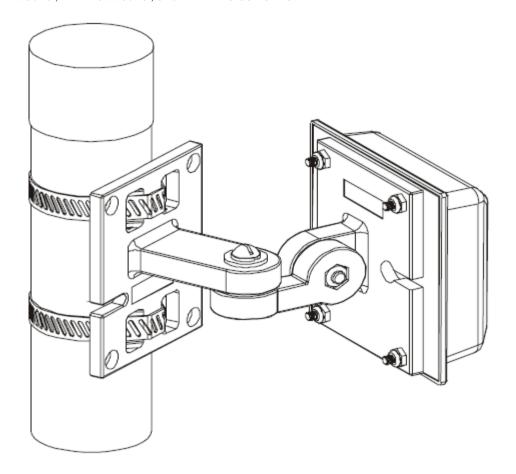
ML-2452-PNA7-01R antenna assembly mounted to a pole
